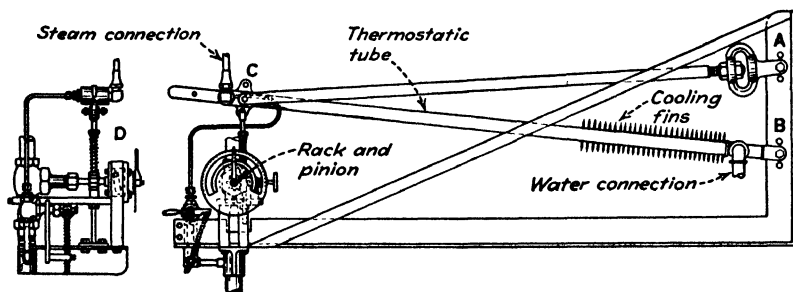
Pivoting the thermostatic tube's free end to produce a rigid triangle multiplies tube expansion. (Courtesy of J. A. Campbell Co.)
